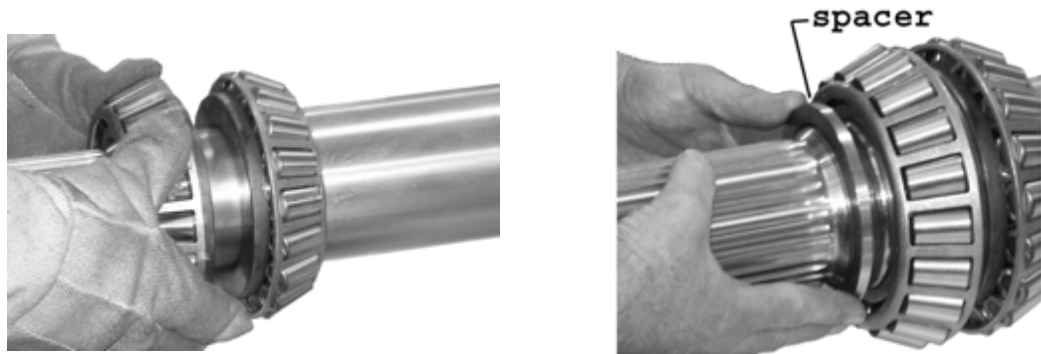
Install Bearings (left), Followed by the Spacer (right)
